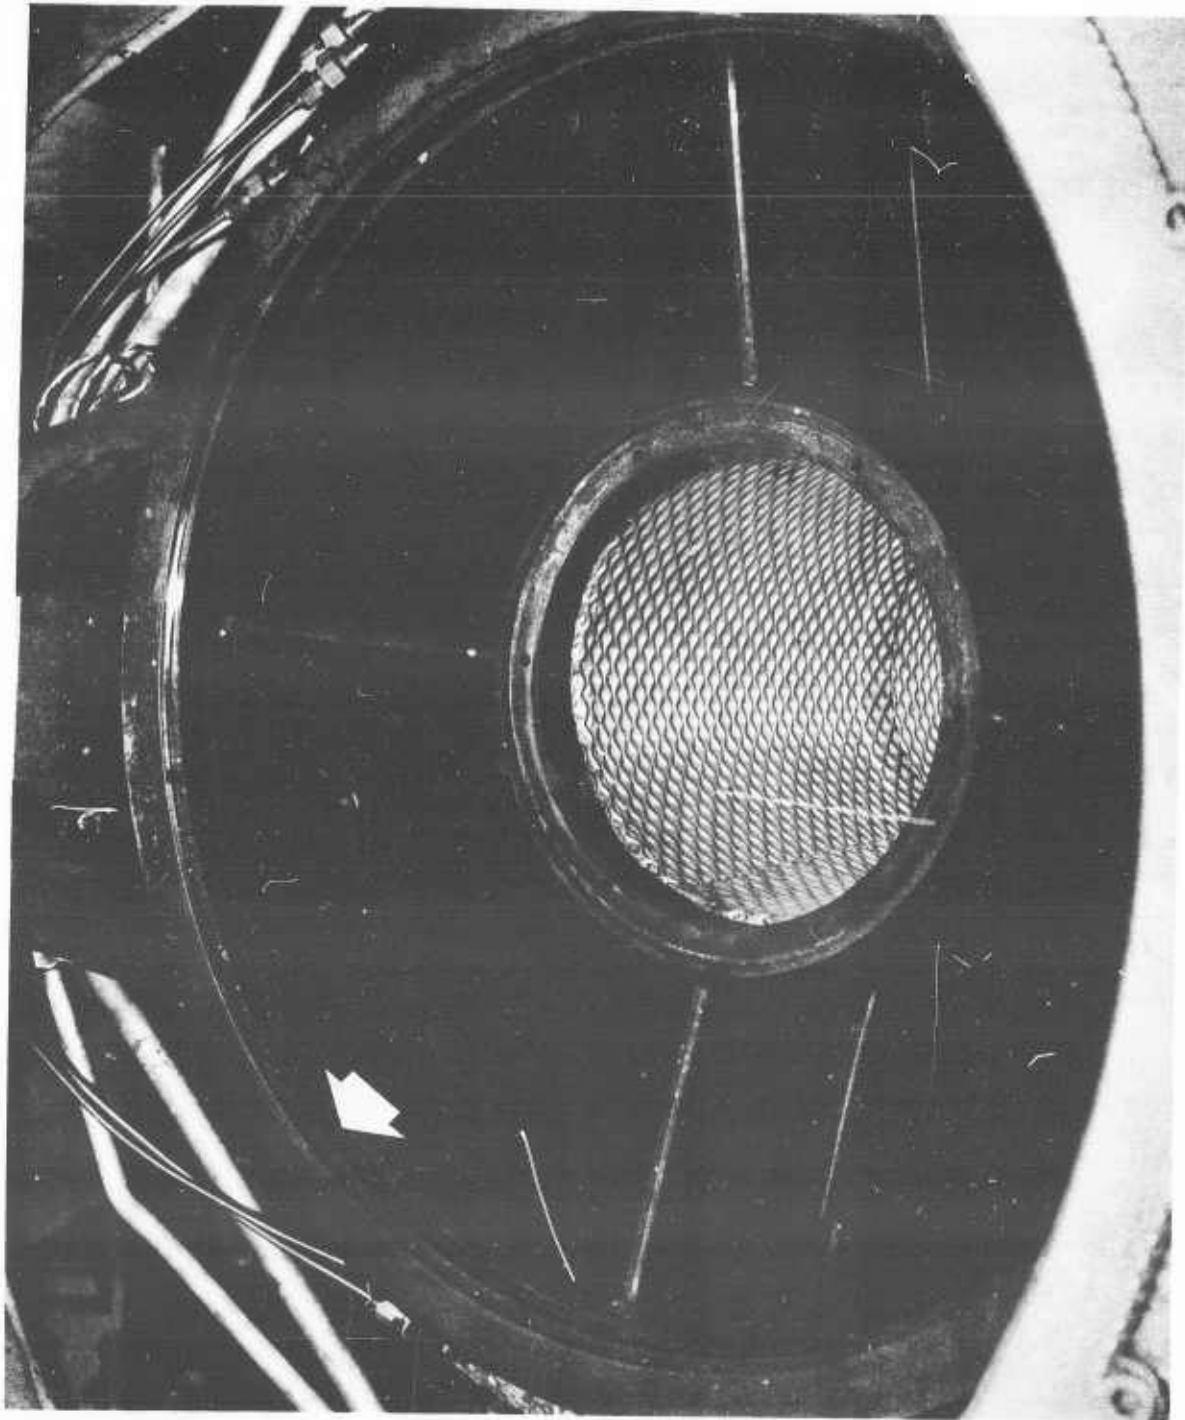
Hub Lower Duct with Outer Seal Segmented Rings in Position, After 18 Hours. Note uniform chipping (apparently from assembly and checkout operations) on upper edge of lower of two carbon rings.
